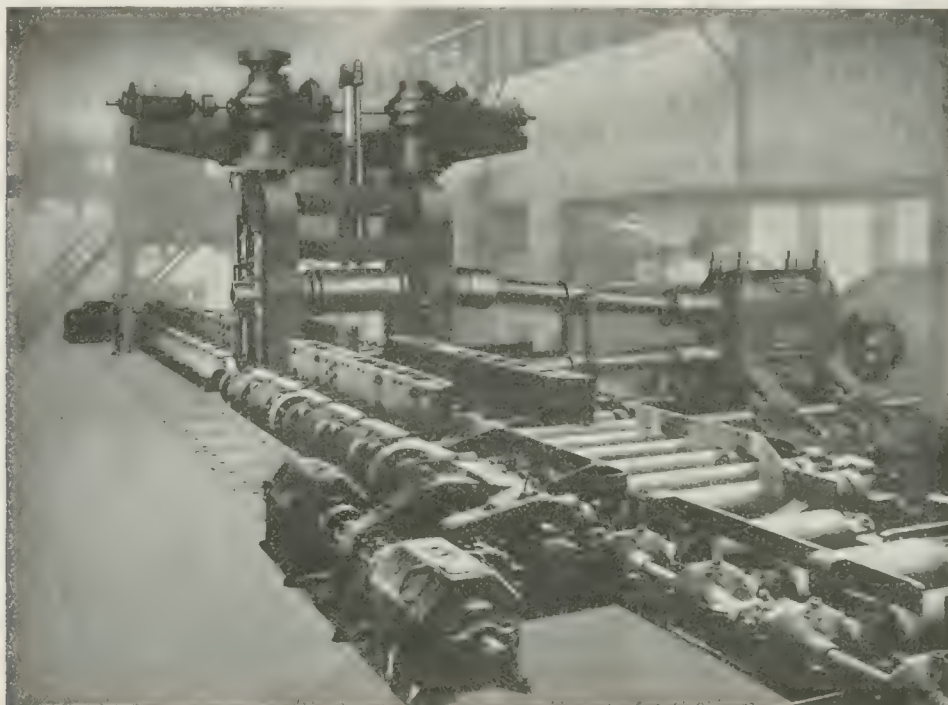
REVERSING BLOOMING MILL SHOWING MOTOR DRIVEN SCREW DOWN AND ROLL TABLES
